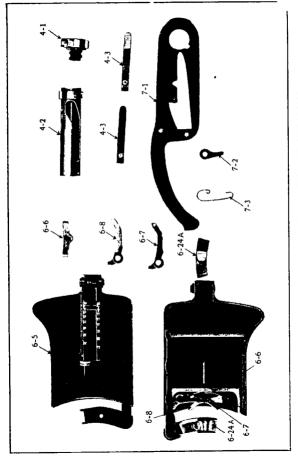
PLATE V-GUN PARTS: FEED MECHANISM, BOLT AND EXTRACTORS
